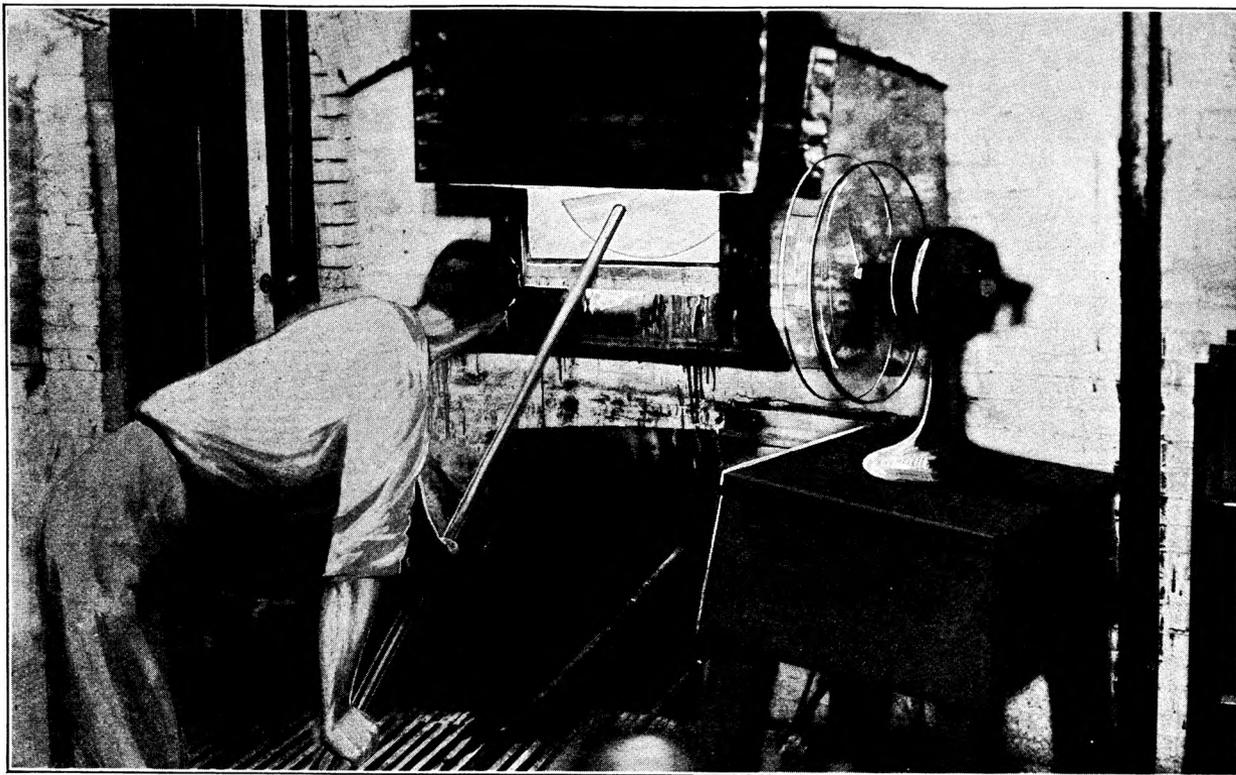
HAND AND CYLINDER MACHINE PROCESS: FLATTENING THE CYLINDER INTO SHEET GLASS
